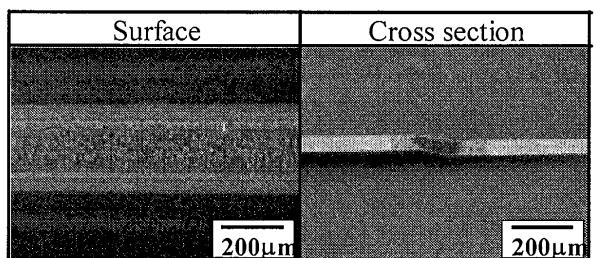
Butt welding of 50μm ultra thin plate
